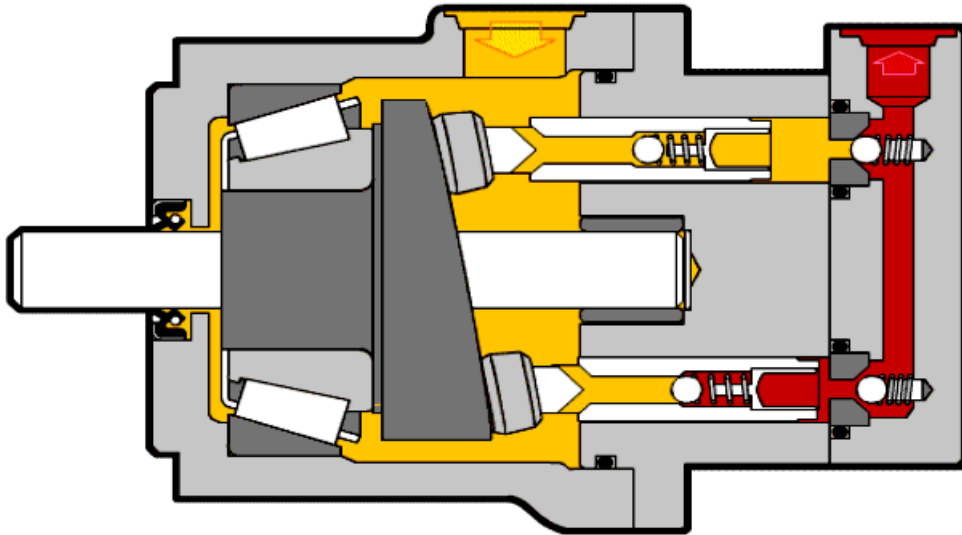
Axial Piston Pump [IHS Global Specs] (4)
